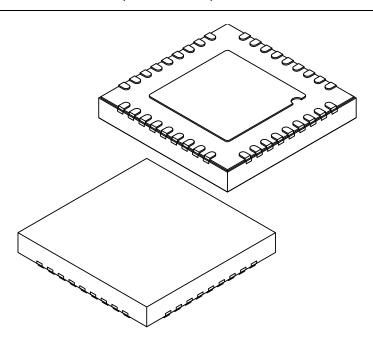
36-VQFN PACKAGE (DRAWING)
